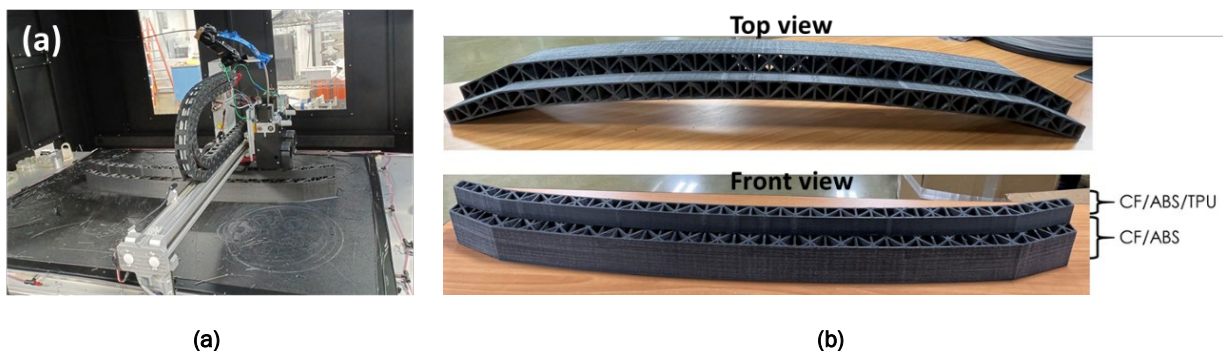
(a) A multimaterial bumper being printed on the 3DP 3D Platform™ printer using filament-based feedstock. (b) 3D-printed multimaterial bumper structure. Source: ORNL.
